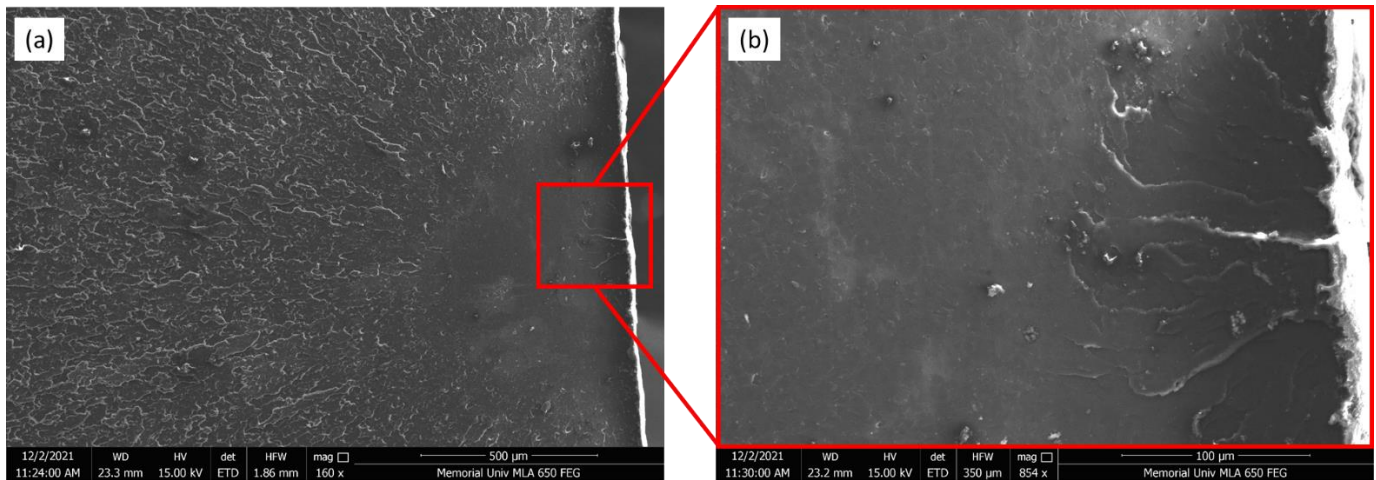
Specimen T4 fractured surface investigation using scan electron microscopy (a) lower magnification (b) higher magnification
